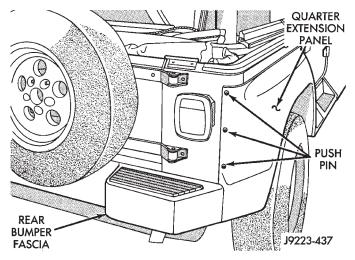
Rear Quarter Extension Push Pins moved, the rocker extension panel must first be separated from the bracket.
